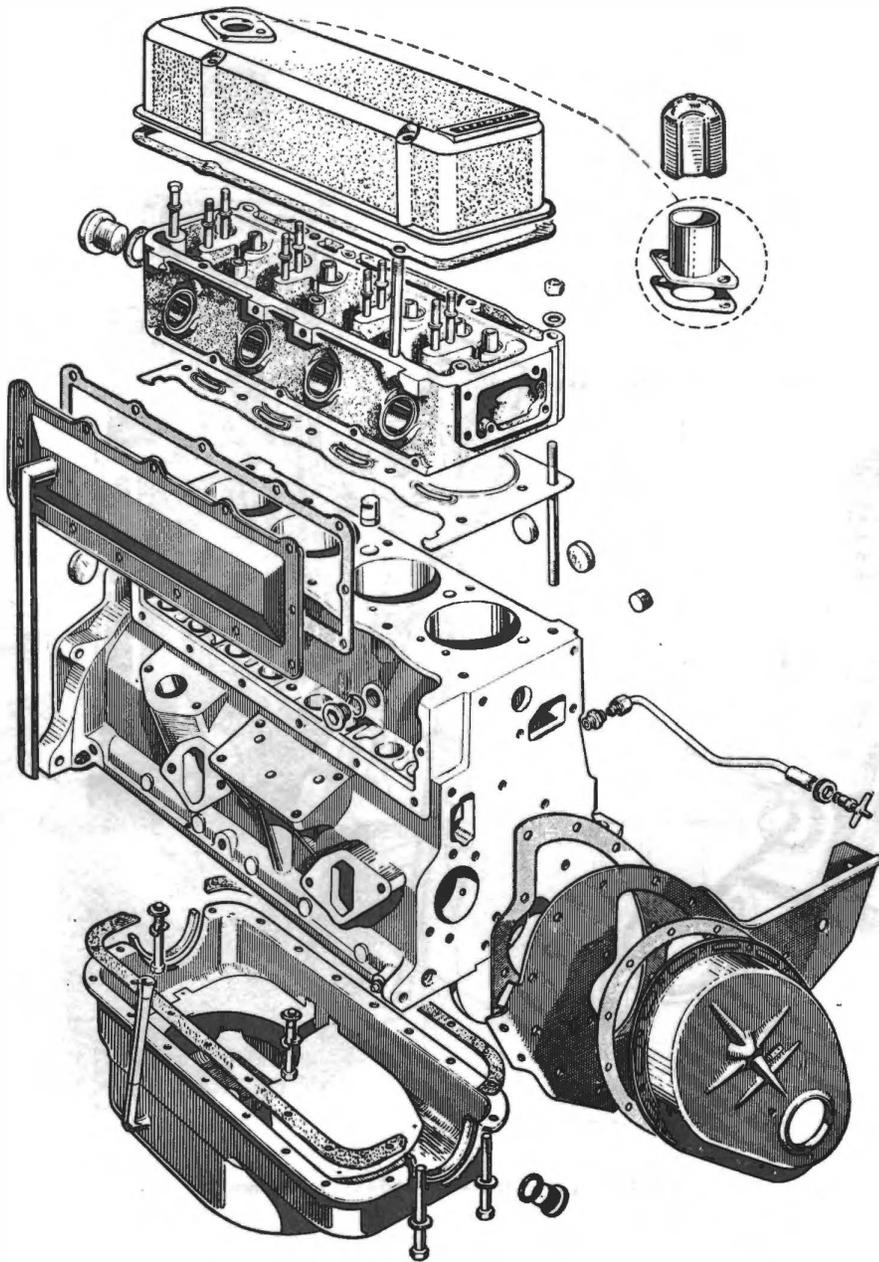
Cylinder block and associated parts (1494 c.c. engine shown)
